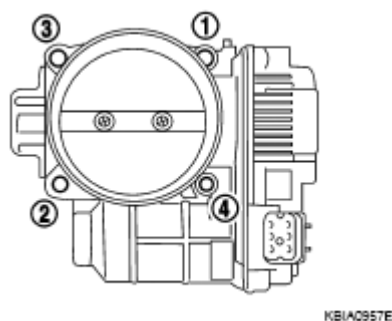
Identifying Electric Throttle Control Actuator Bolts Tightening Sequence
